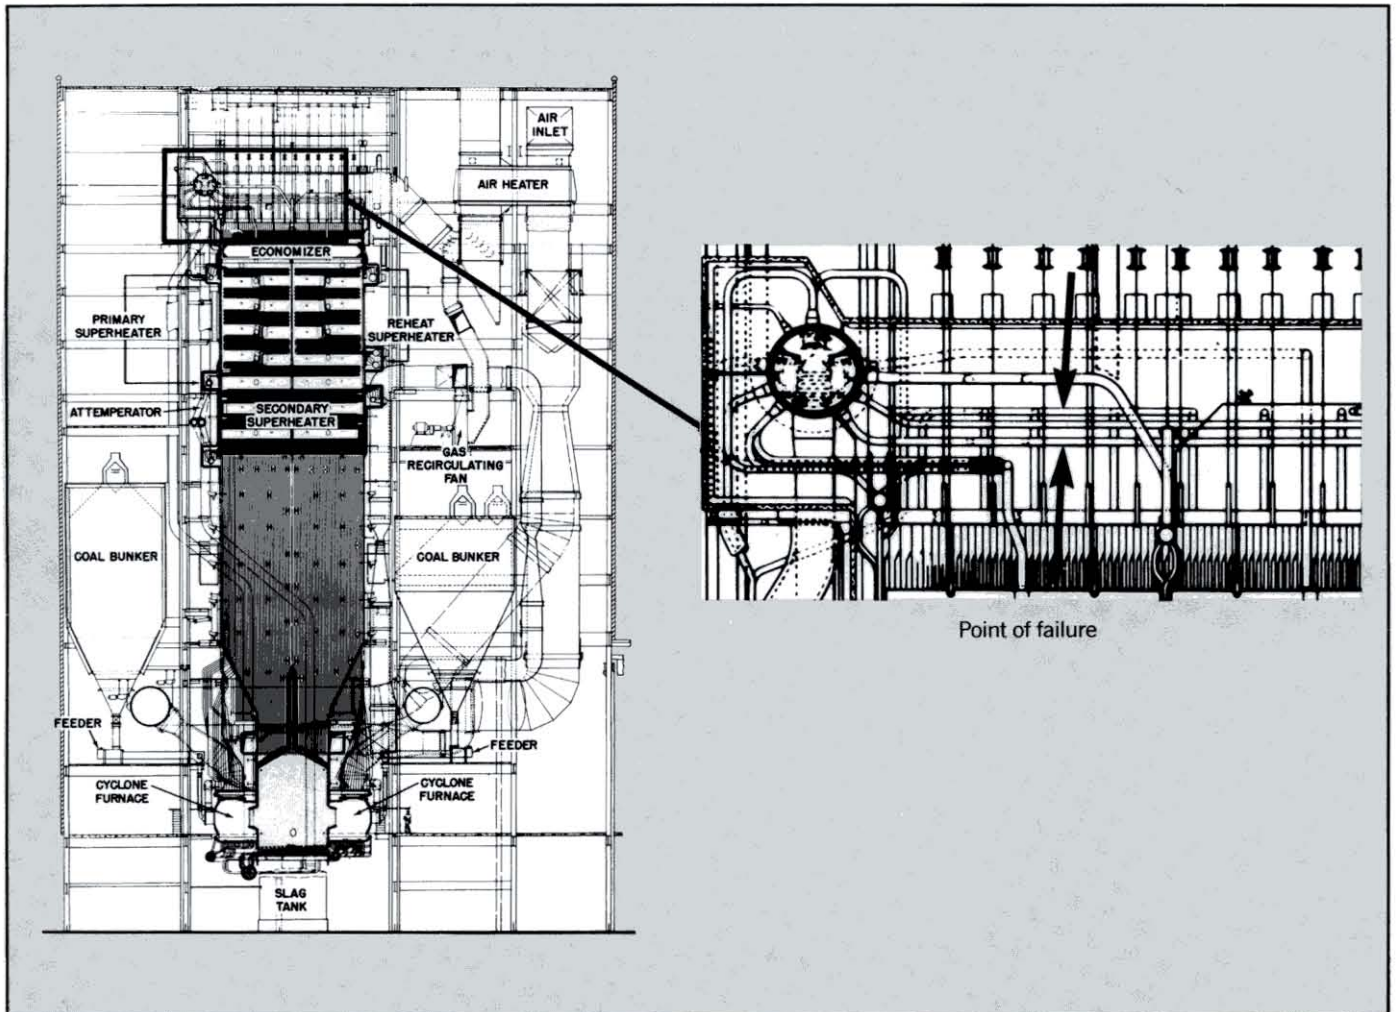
Typical location for failures in furnace sidewall riser tubes.
